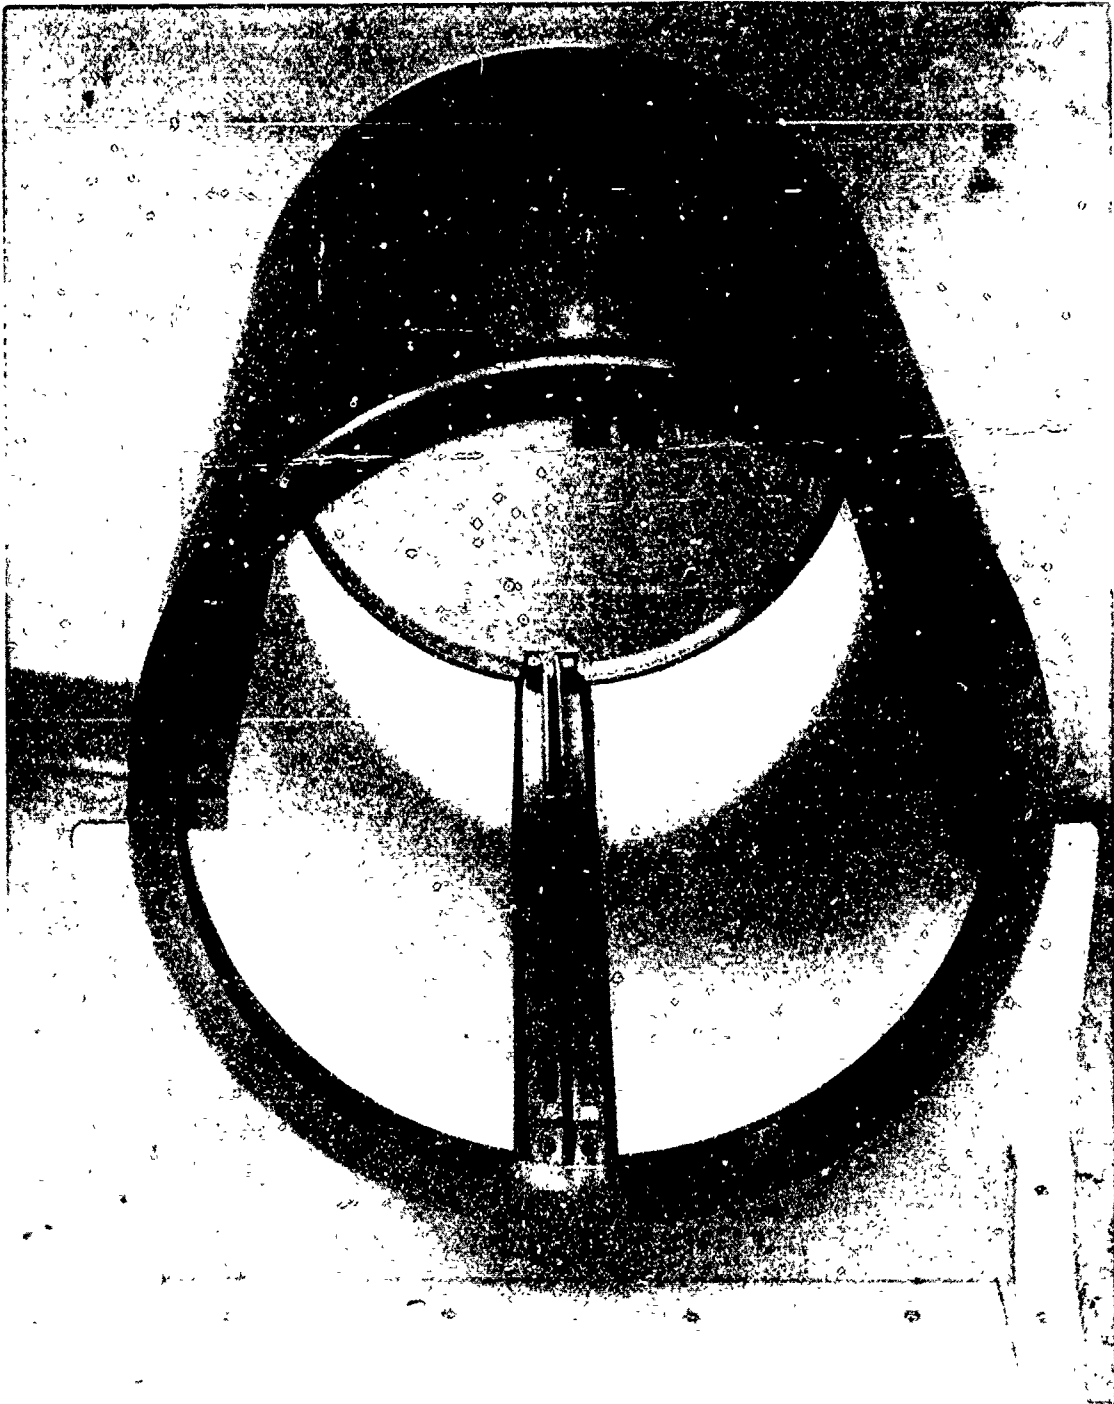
Inside view of the 20-inch-diameter cylindrical section. Note the rails for equipment shelves.
